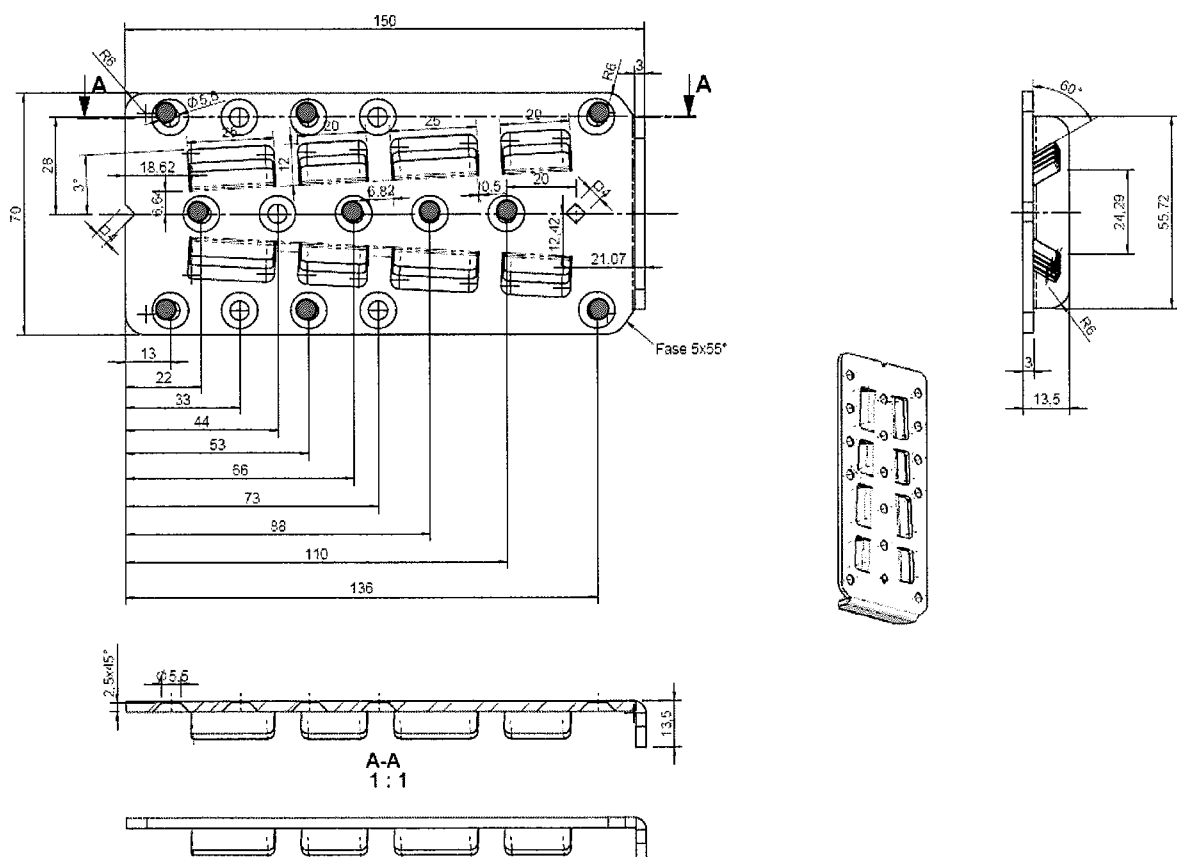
Header plate of the beam connector 150 x 70 (● screws for column connection)
